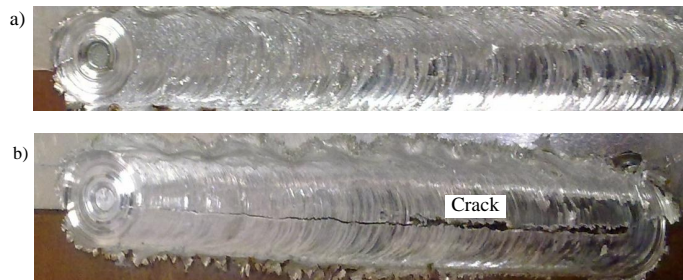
Surface morphologies of the FSW Al-Cu joints under a welding parameter of 710 rpm – 100mm/min the Cu plate fixed at (a) advancing side (b) retreating side
